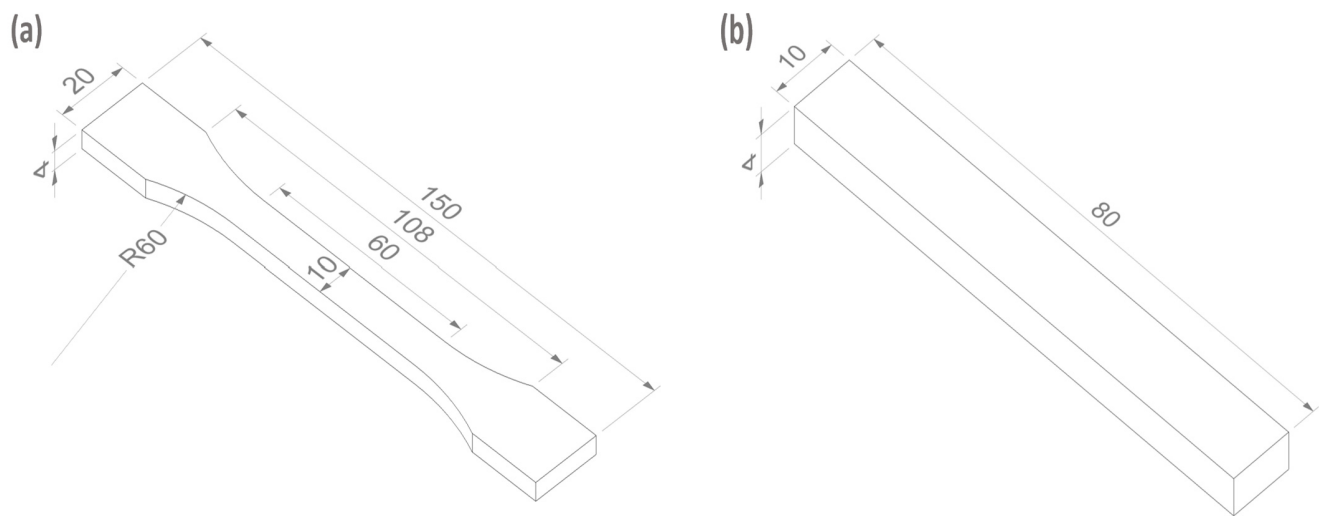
Samples for testing: (a) tensile sample; (b) flexural sample. Dimensions are in mm.
